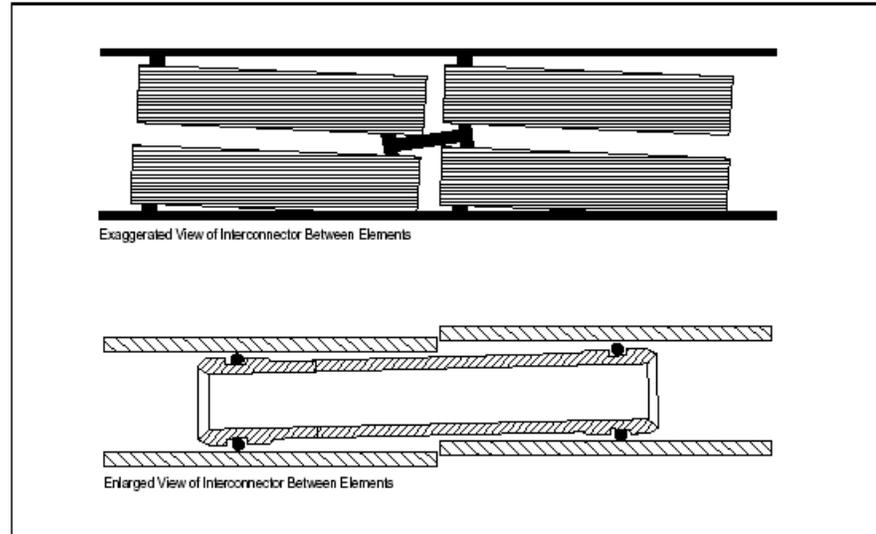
O-ring cross-section of 2 o-ring and “dog bone” interconnector ends
